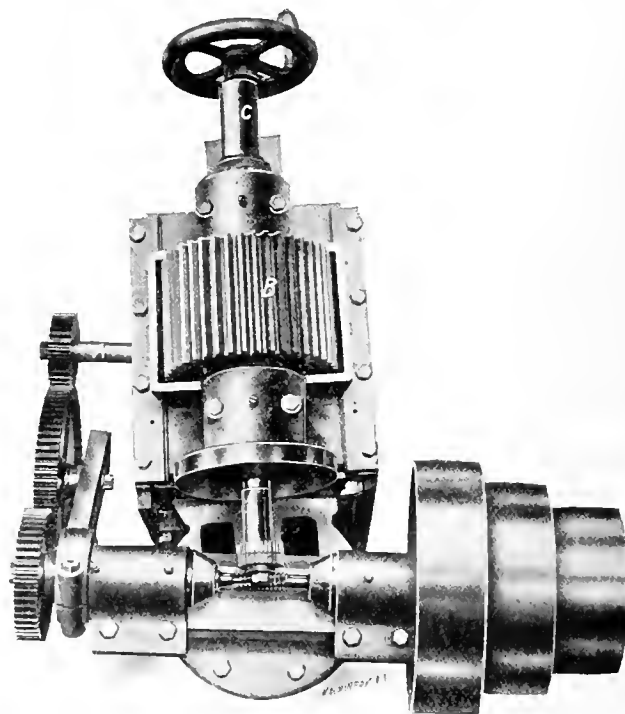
Top View of the Spur Gear Hobbing Machine.
